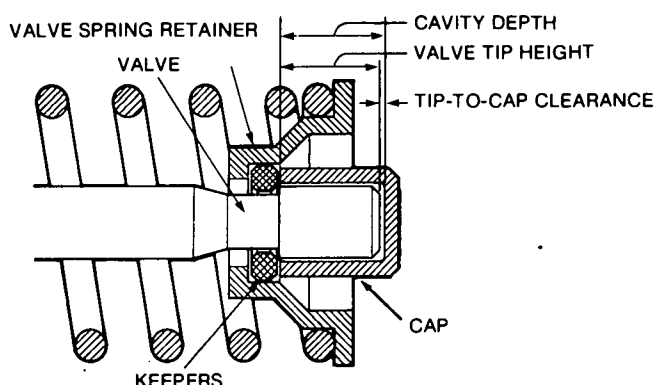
MEASURING VALVE TIP-TO-CAP CLEARANCE
